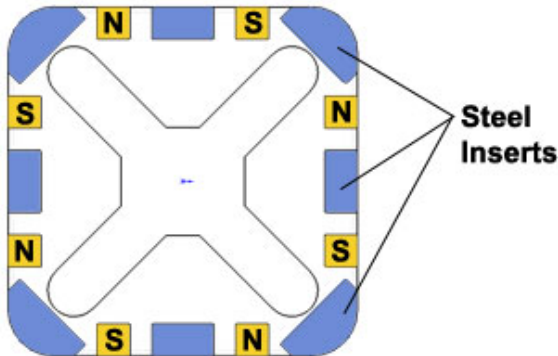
Top section view of the center body, showing alternating magnet polarities and steel inserts.
